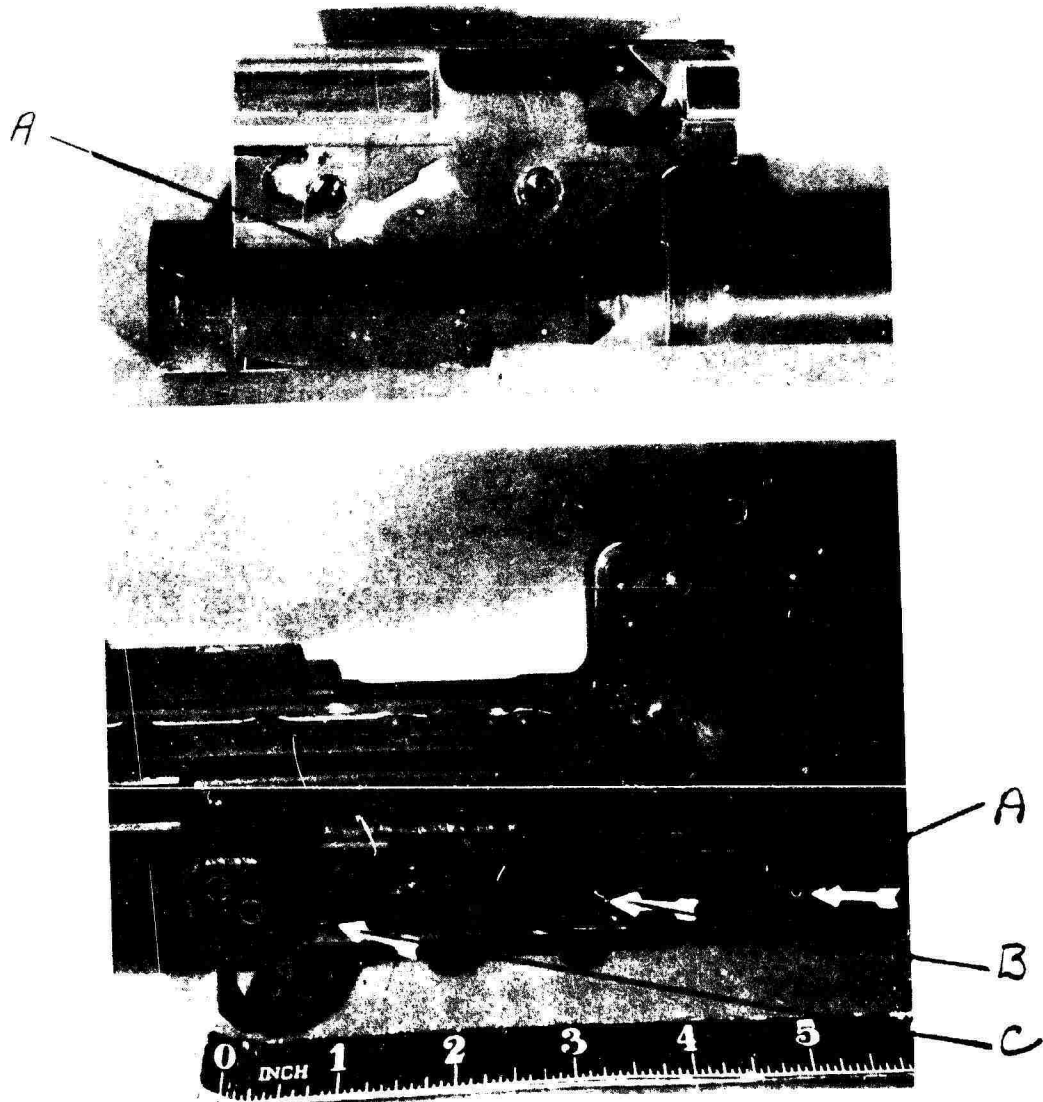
Pretest Inspection Crack Patterns (TOP) (Part No. 15), (BOTTOM) (Part No. 29).
